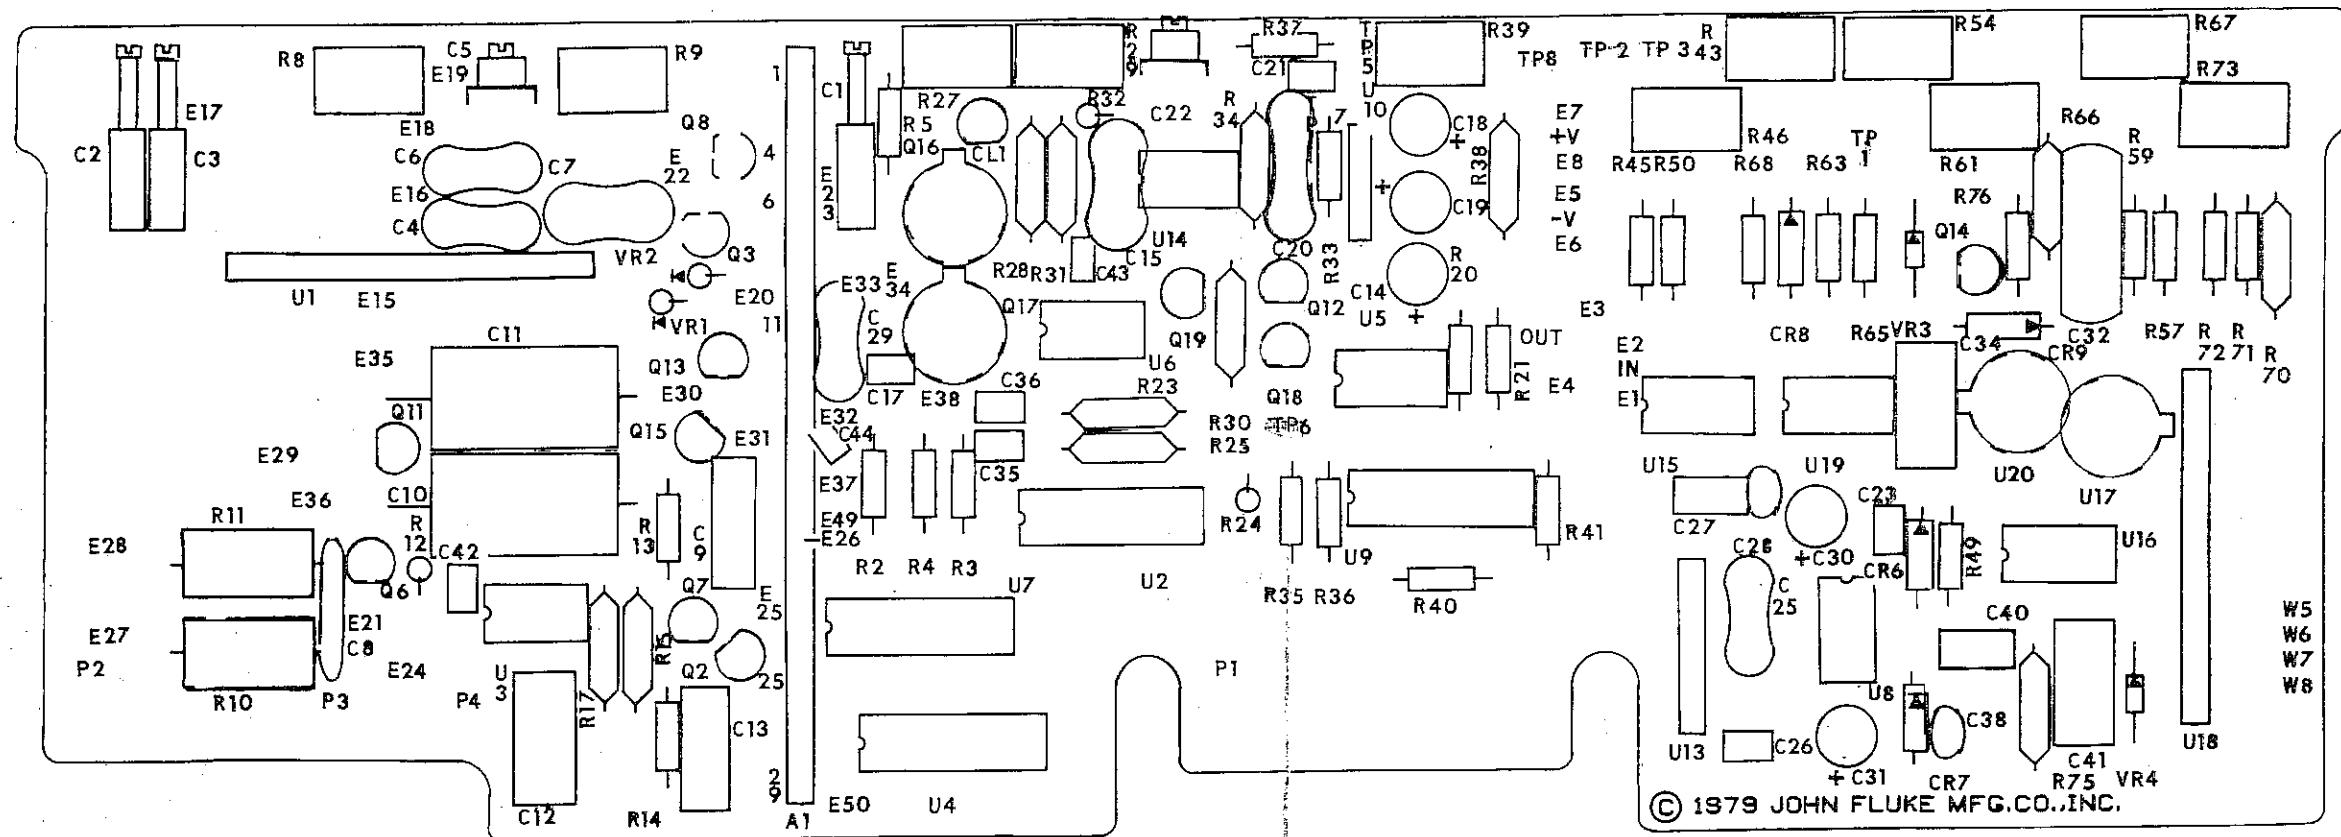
A4 AC/DC Scaling PCB Assembly
